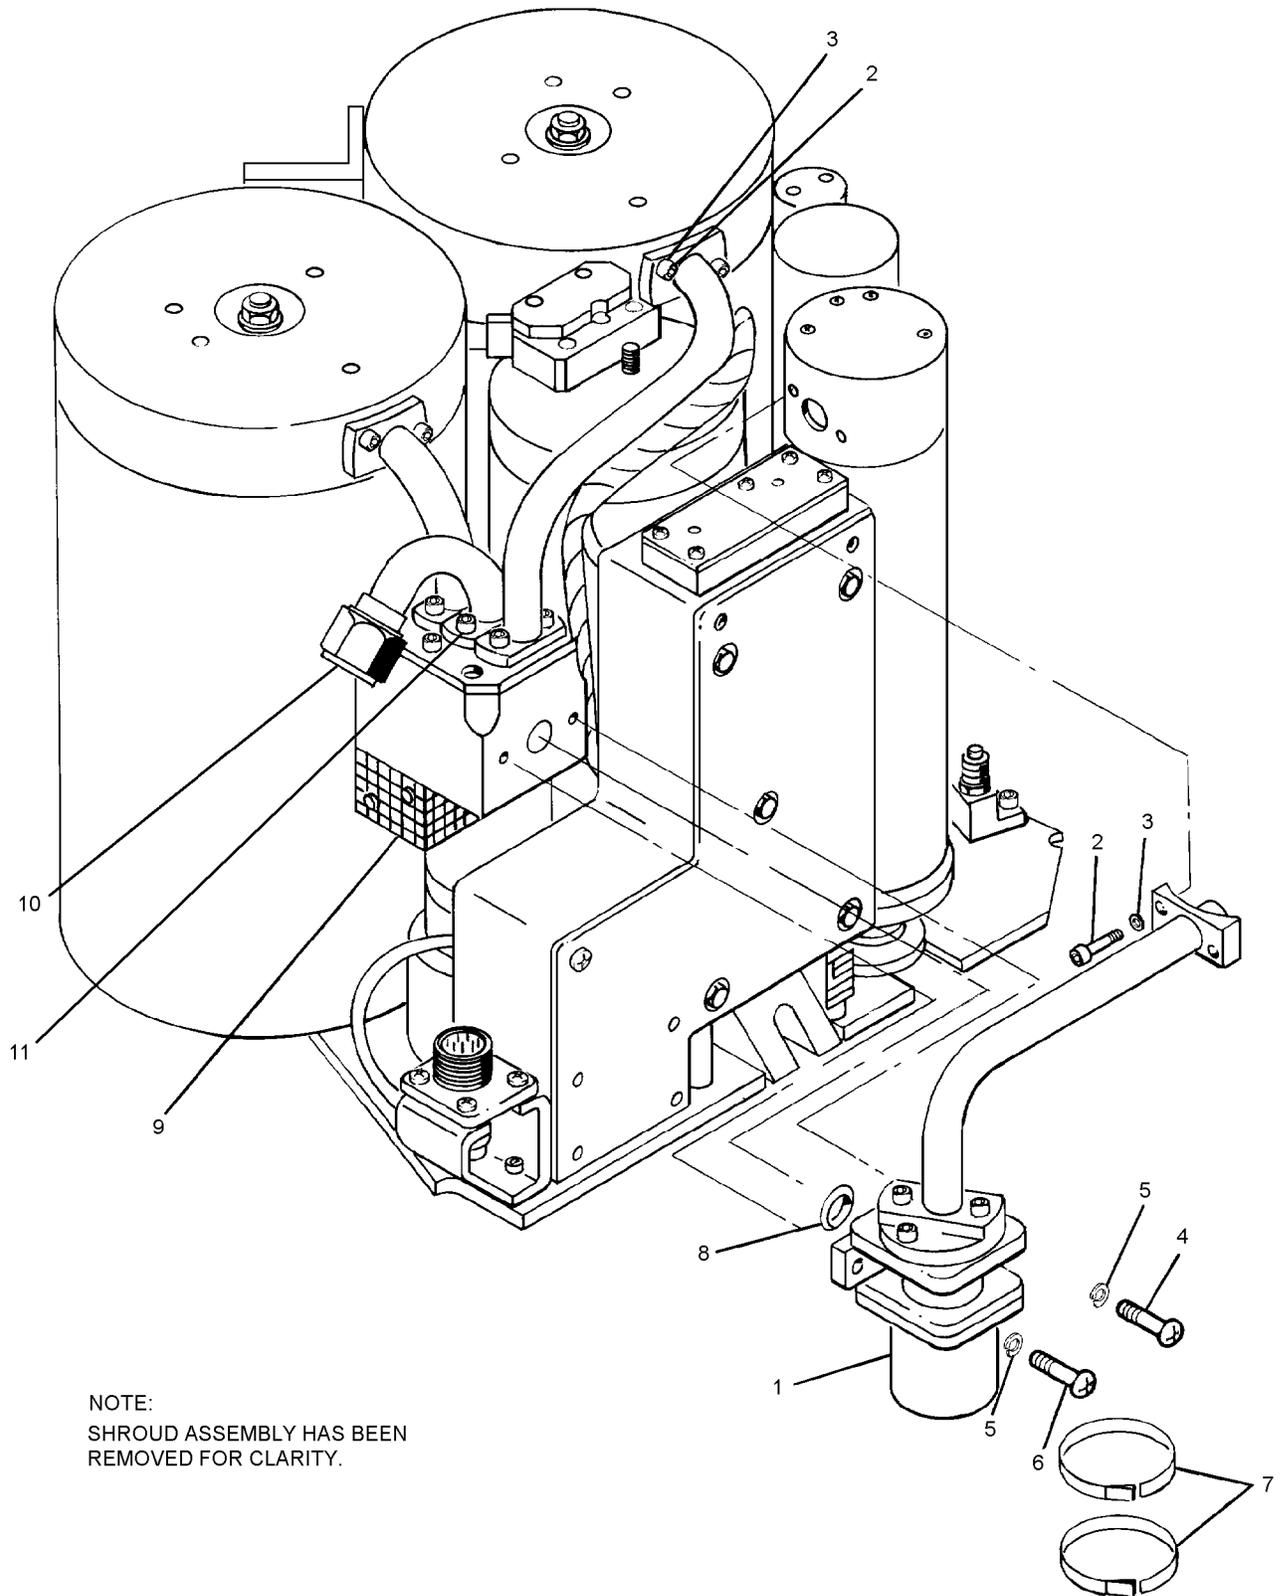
Pressure Reducer and Rotary Valve and Vent Tube Assemblies
